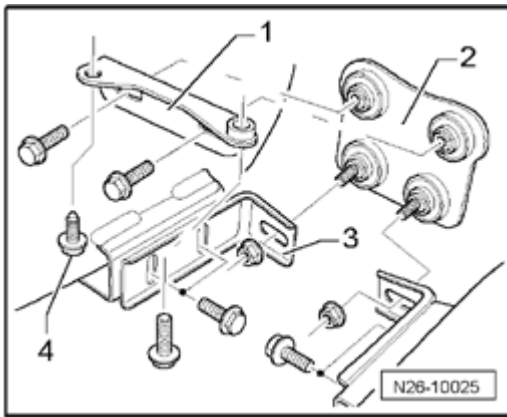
Identifying Bracket, Base Plate, Angle Bracket & Tapered Bushings
